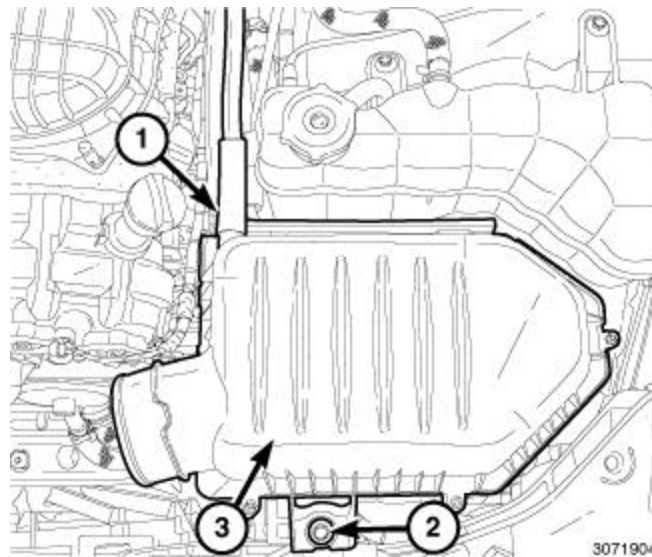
Fresh Air Makeup Hose, Air Cleaner Housing & Bolt
